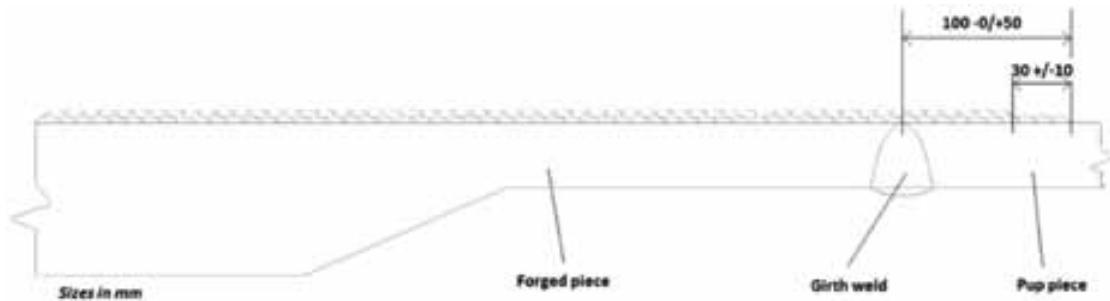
weld overlay covering BA, girth weld and pup piece.
